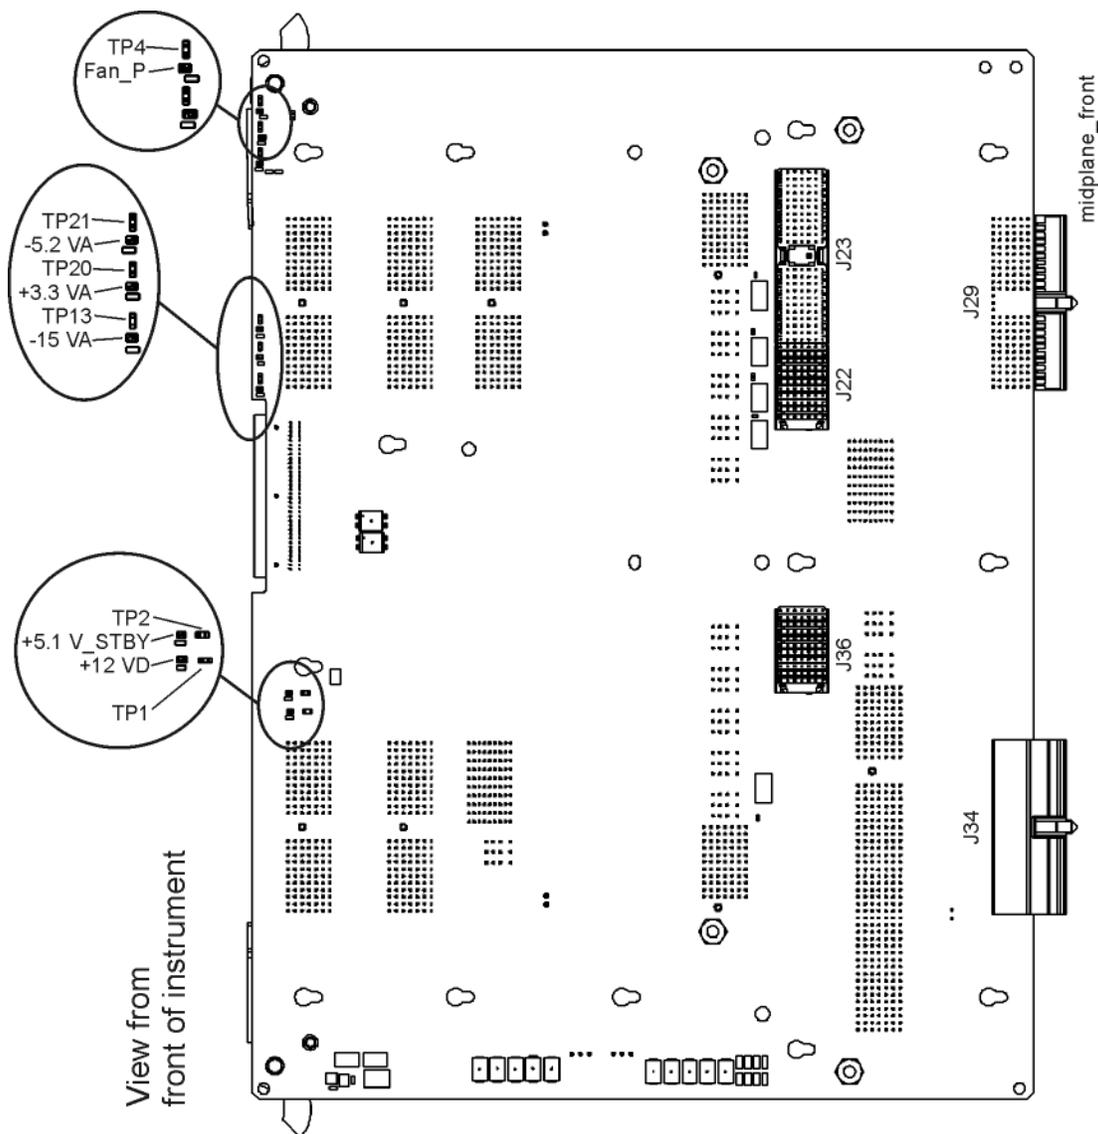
A7 Midplane Board Assembly Connections, LED's, and Test Points - Front View
